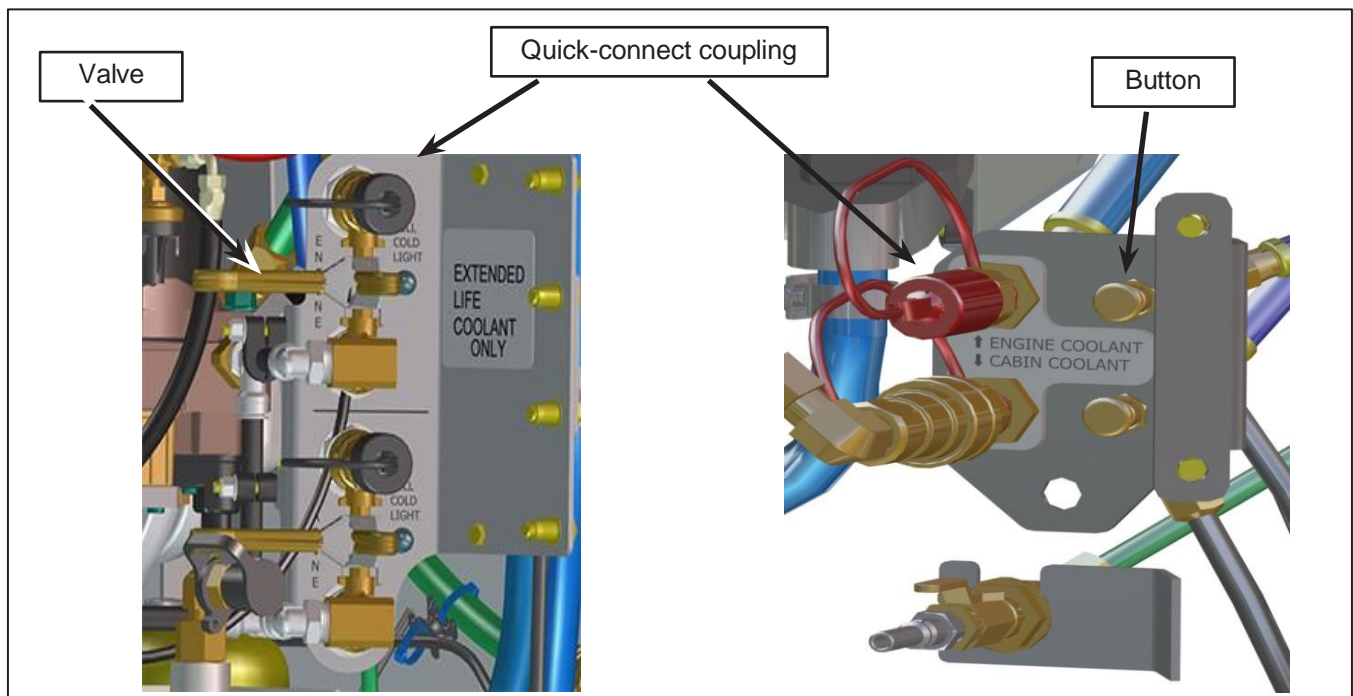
Coolant Quick Connect Filling Fitting and Valve
